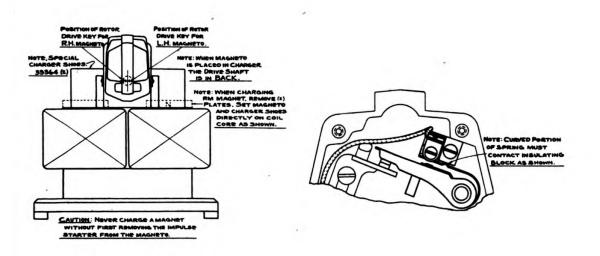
MAGNETO ASSEMBLY DETAILS
